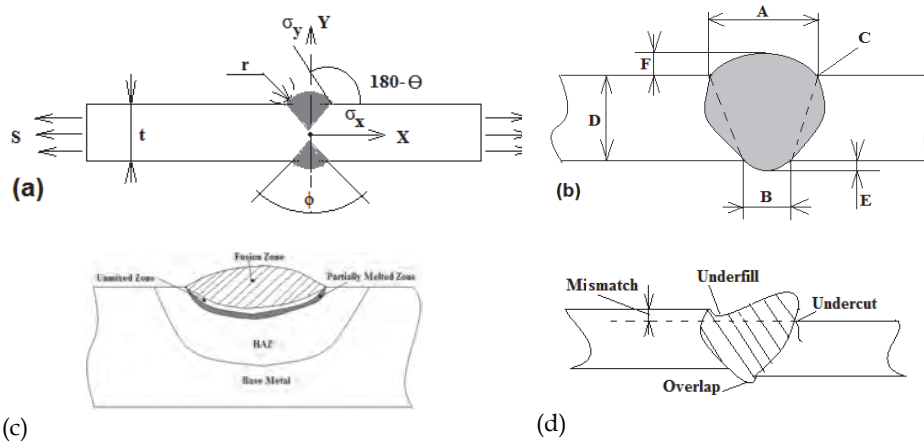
Schematic illustration of (a) geometrical parameters of a typical butt weld with a double V edge preparation, where  $r$  is weld toe radius,  $\phi$  weld flank angle and  $t$  plate thickness; (b) geometrical structure of a weld, where  $A$  is weld face,  $B$  the root of the weld,  $C$  weld toe,  $D$  the plate thickness or weld penetration,  $E$  root reinforcement, and  $F$  face reinforcement; (c) compositional structure of a typical weld; and (d) geometric weld discontinuities.
